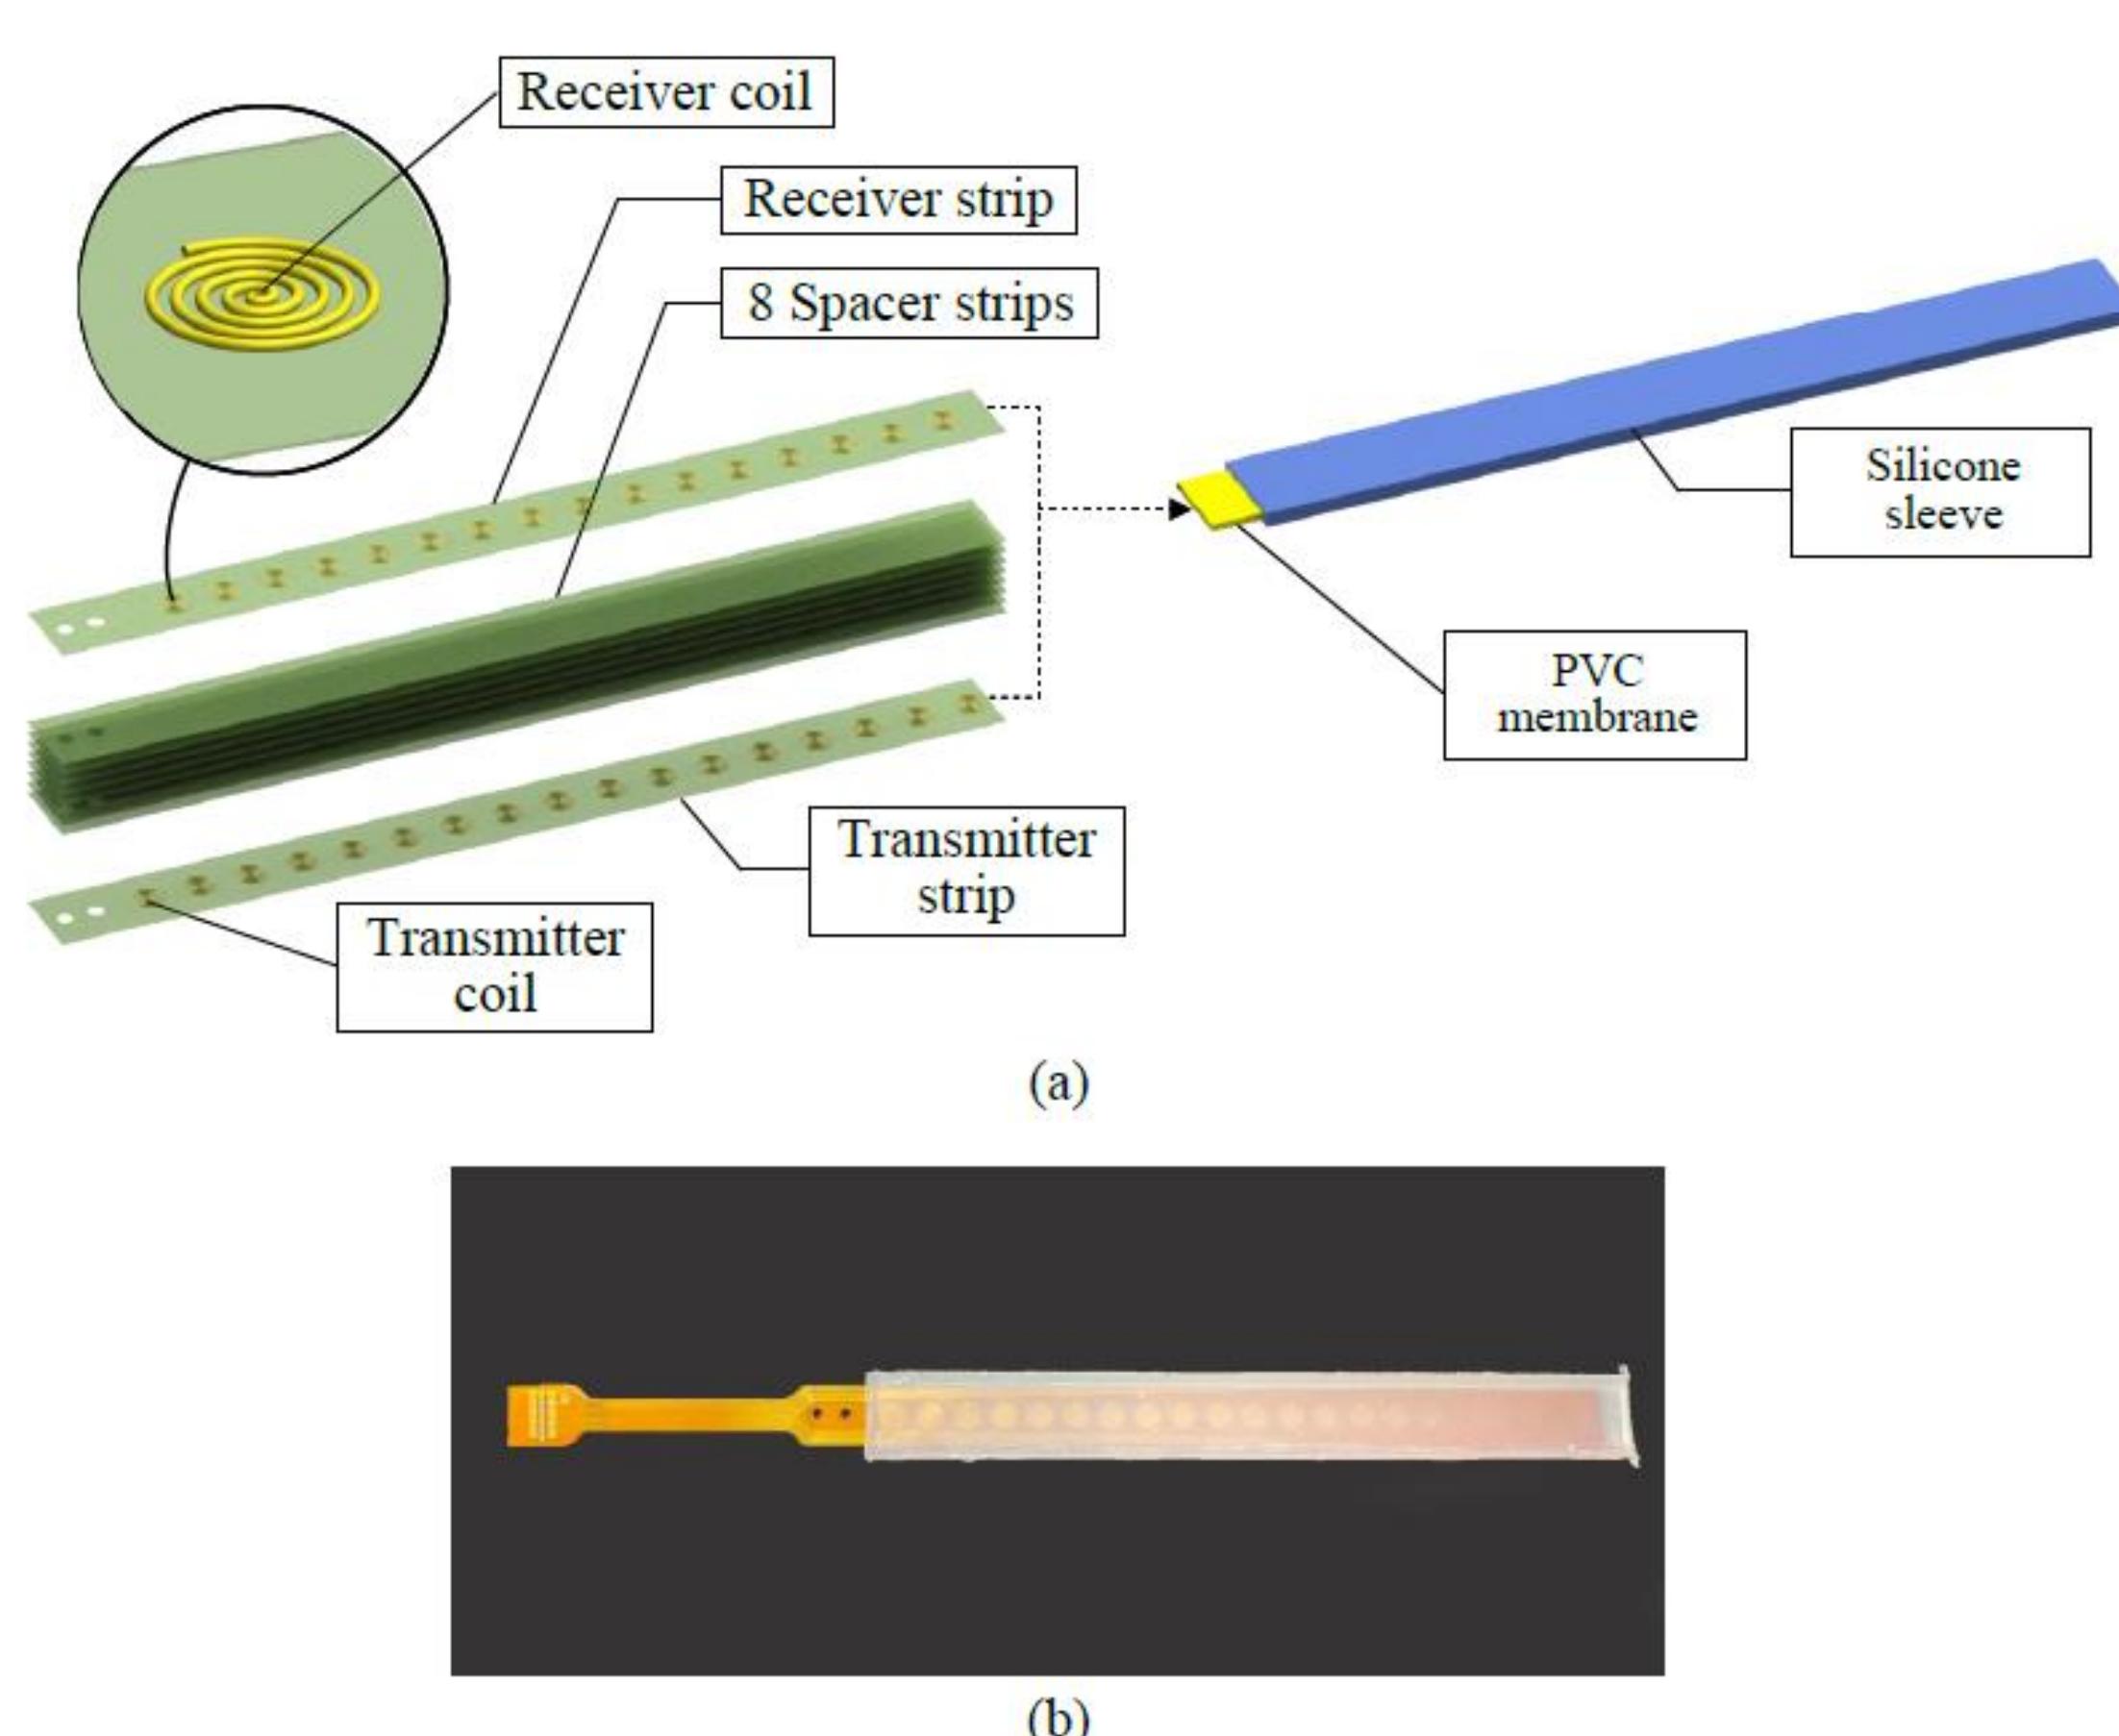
Illustration of the proposed curvature sensor. (a) Components and assembly layout of the sensor; (b) an assembled prototype.
